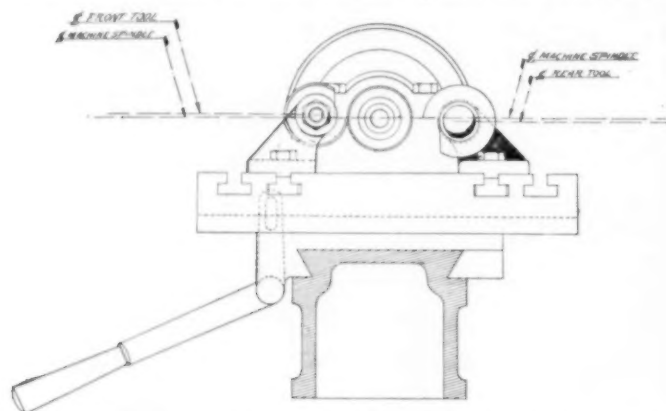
CIRCULAR FORMING AND CUT-OFF TOOLS IN POSITION ON CROSS SLIDE OF MACHINE. SIDE VIEW.
